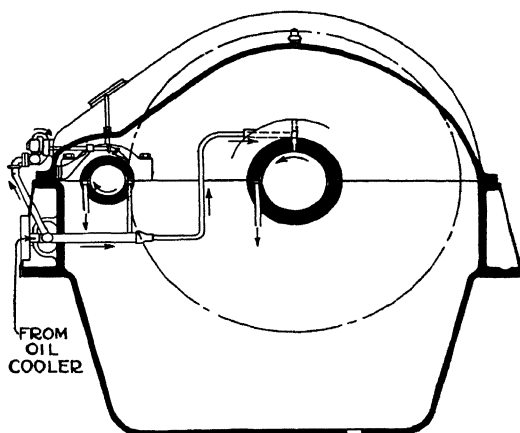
Large gear set lubricated with oil from turbine circulation-oiling system. (Courtesy Socony-Vacuum Oil Co.)
